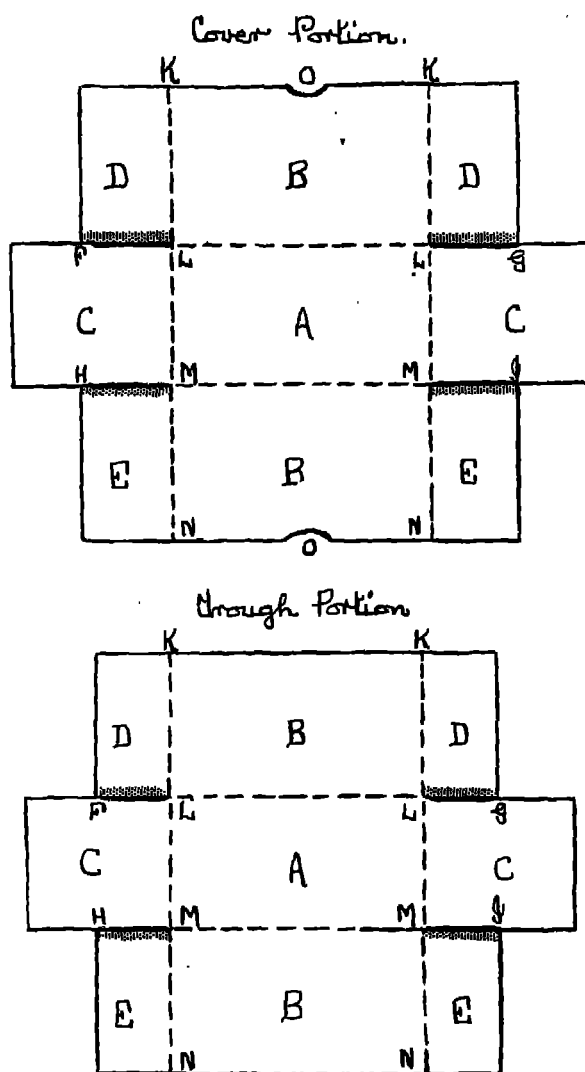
TWO-PIECE SUGAR PACKAGE.
